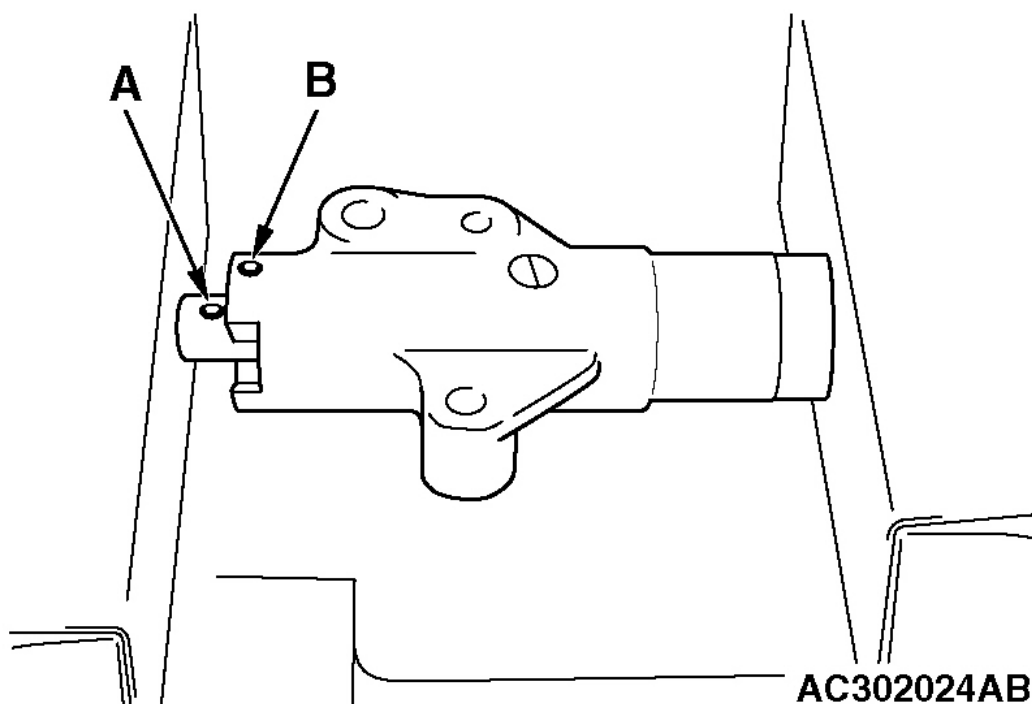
Compressing & Aligning Hole A With Hole B Of Timing Belt Tensioner Adjuster Cylinder
